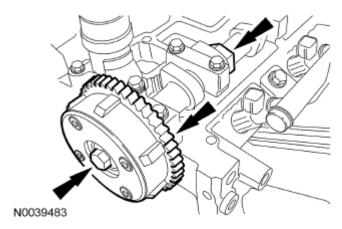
Locating Flats On Camshaft, Bolt And Exhaust Camshaft Sprocket Courtesy of FORD MOTOR CO.
